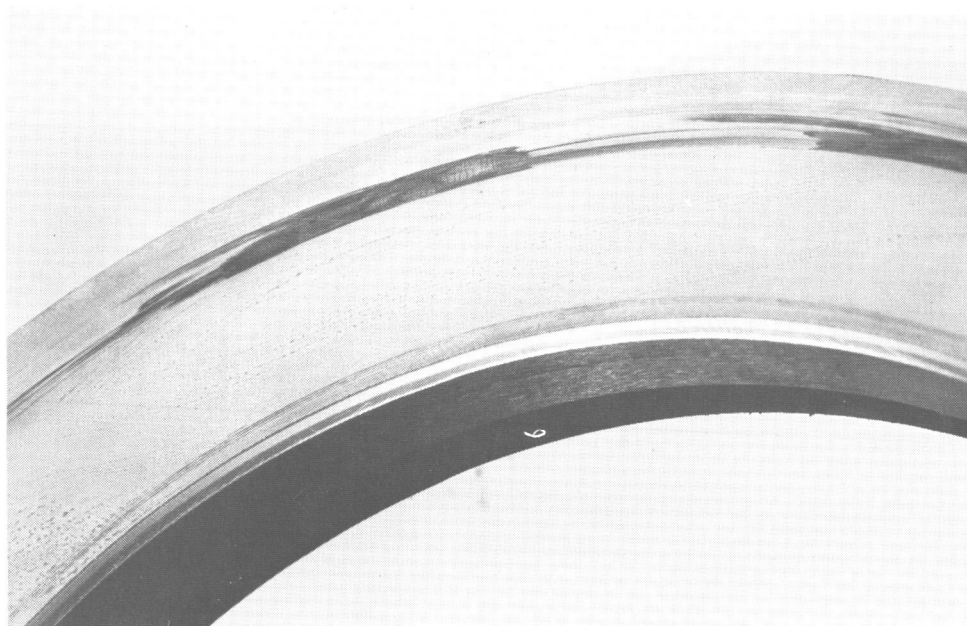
Mainshaft Seal Rig 29,360 - Close-Up View of Carbon Lip Wear Path on the PWA 771 Seal Plate with LCIC Hardface.
